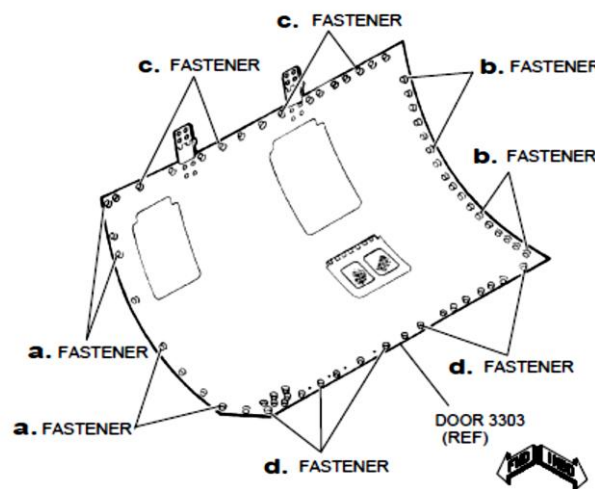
Example of Fasteners (F-16 Tacking Door)
